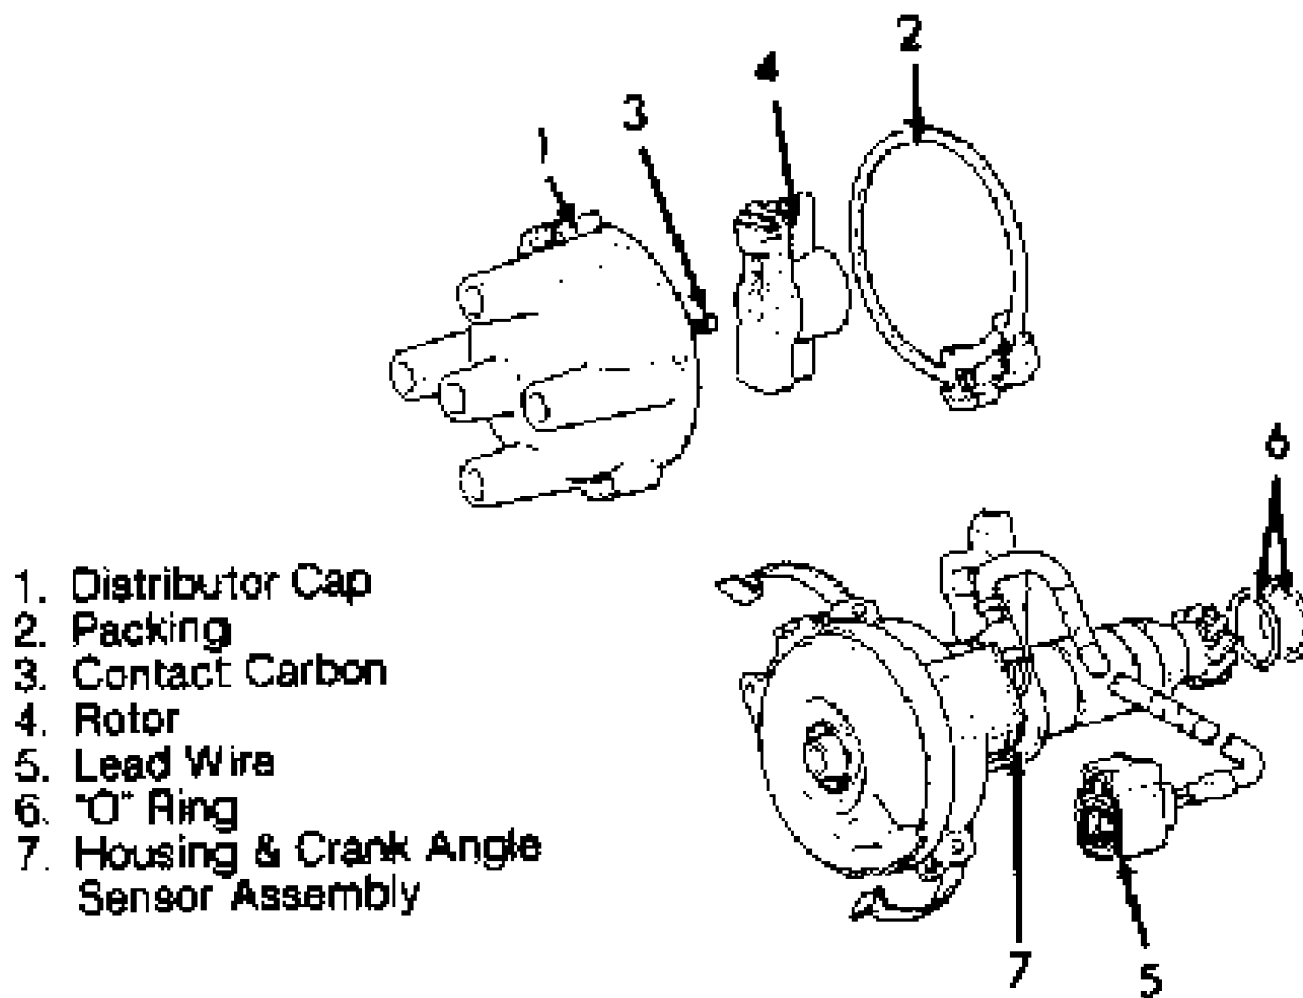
Exploded View of Distributor (Pickup & Ram-50 2.4L)
